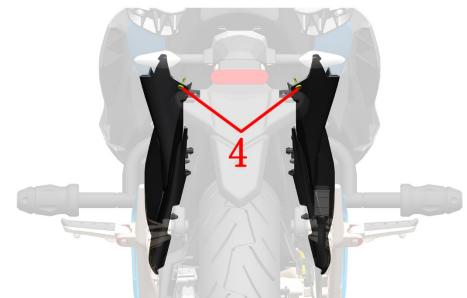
SIDE COVER COMPONENT		Side cover component 1	CHK
